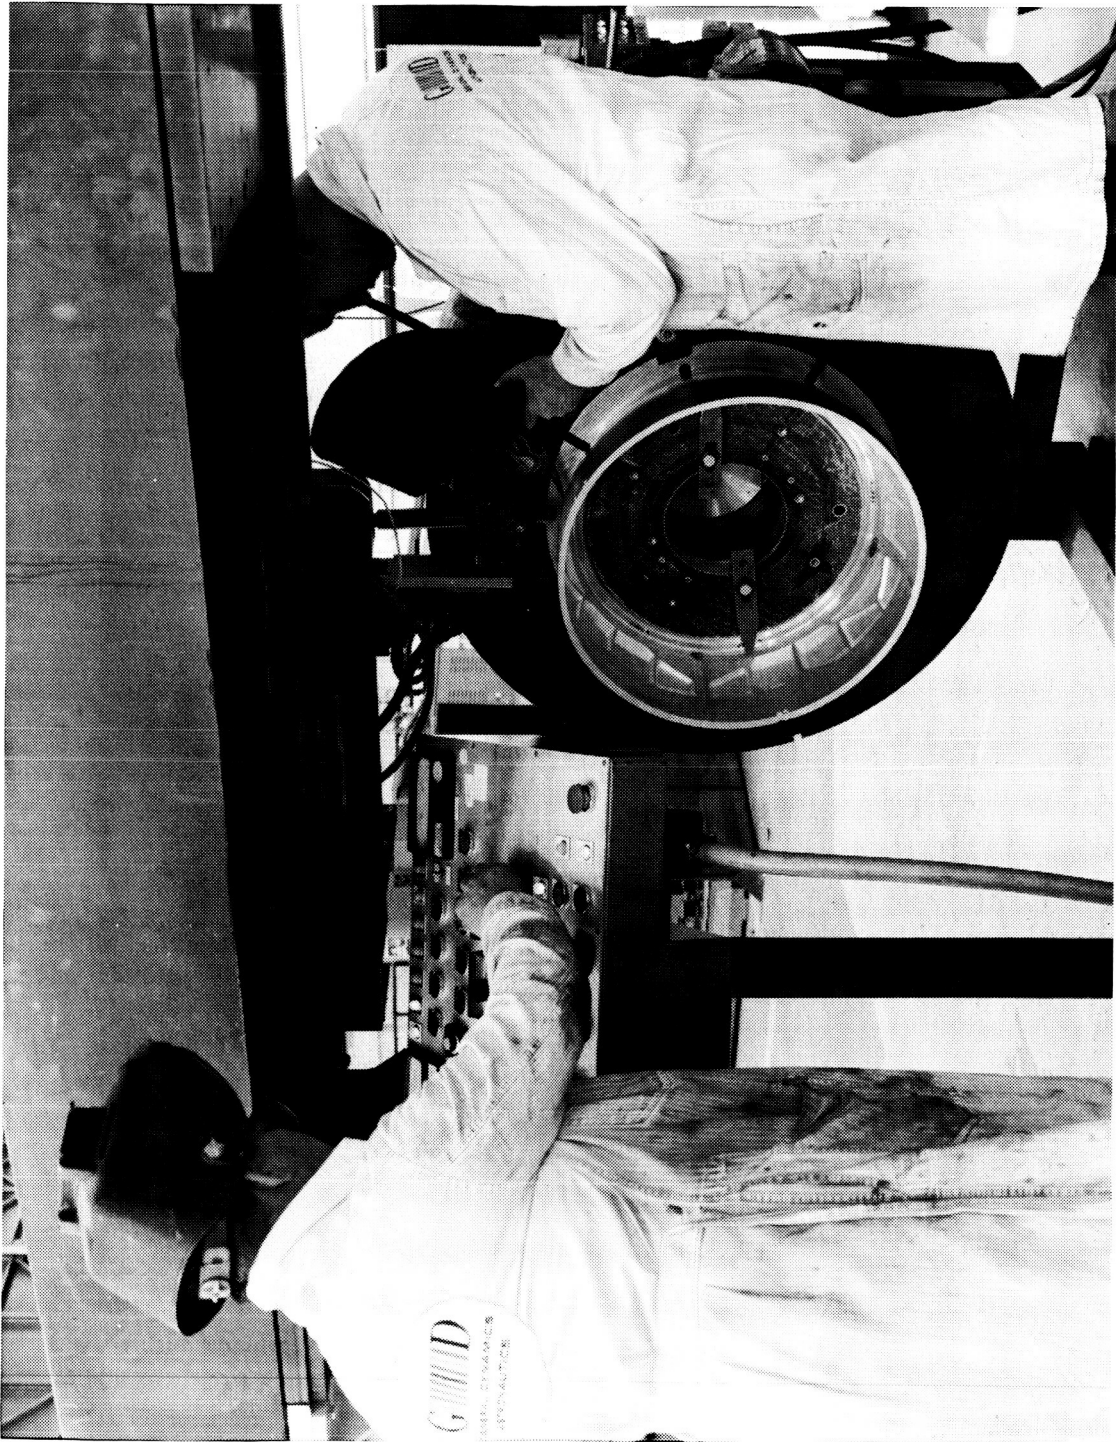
Weld Engineer Supervising Automatic TIG
